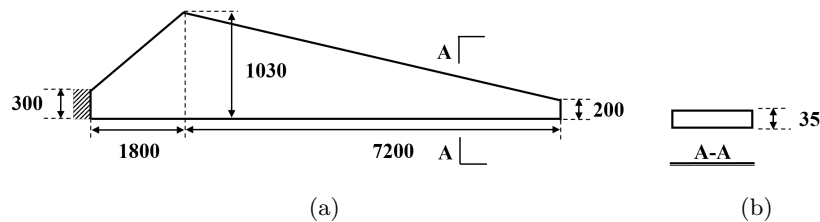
Wind turbine blade dimensions (mm) (a) top view; and (b) cross section.
